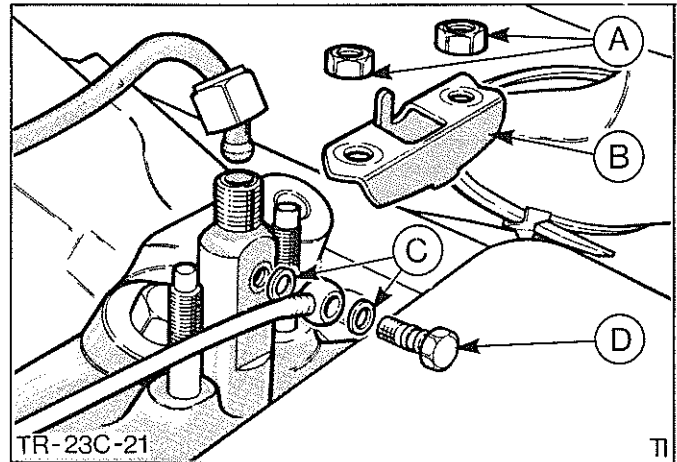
Disconnect banjo bolts and remove leak off pipe.
